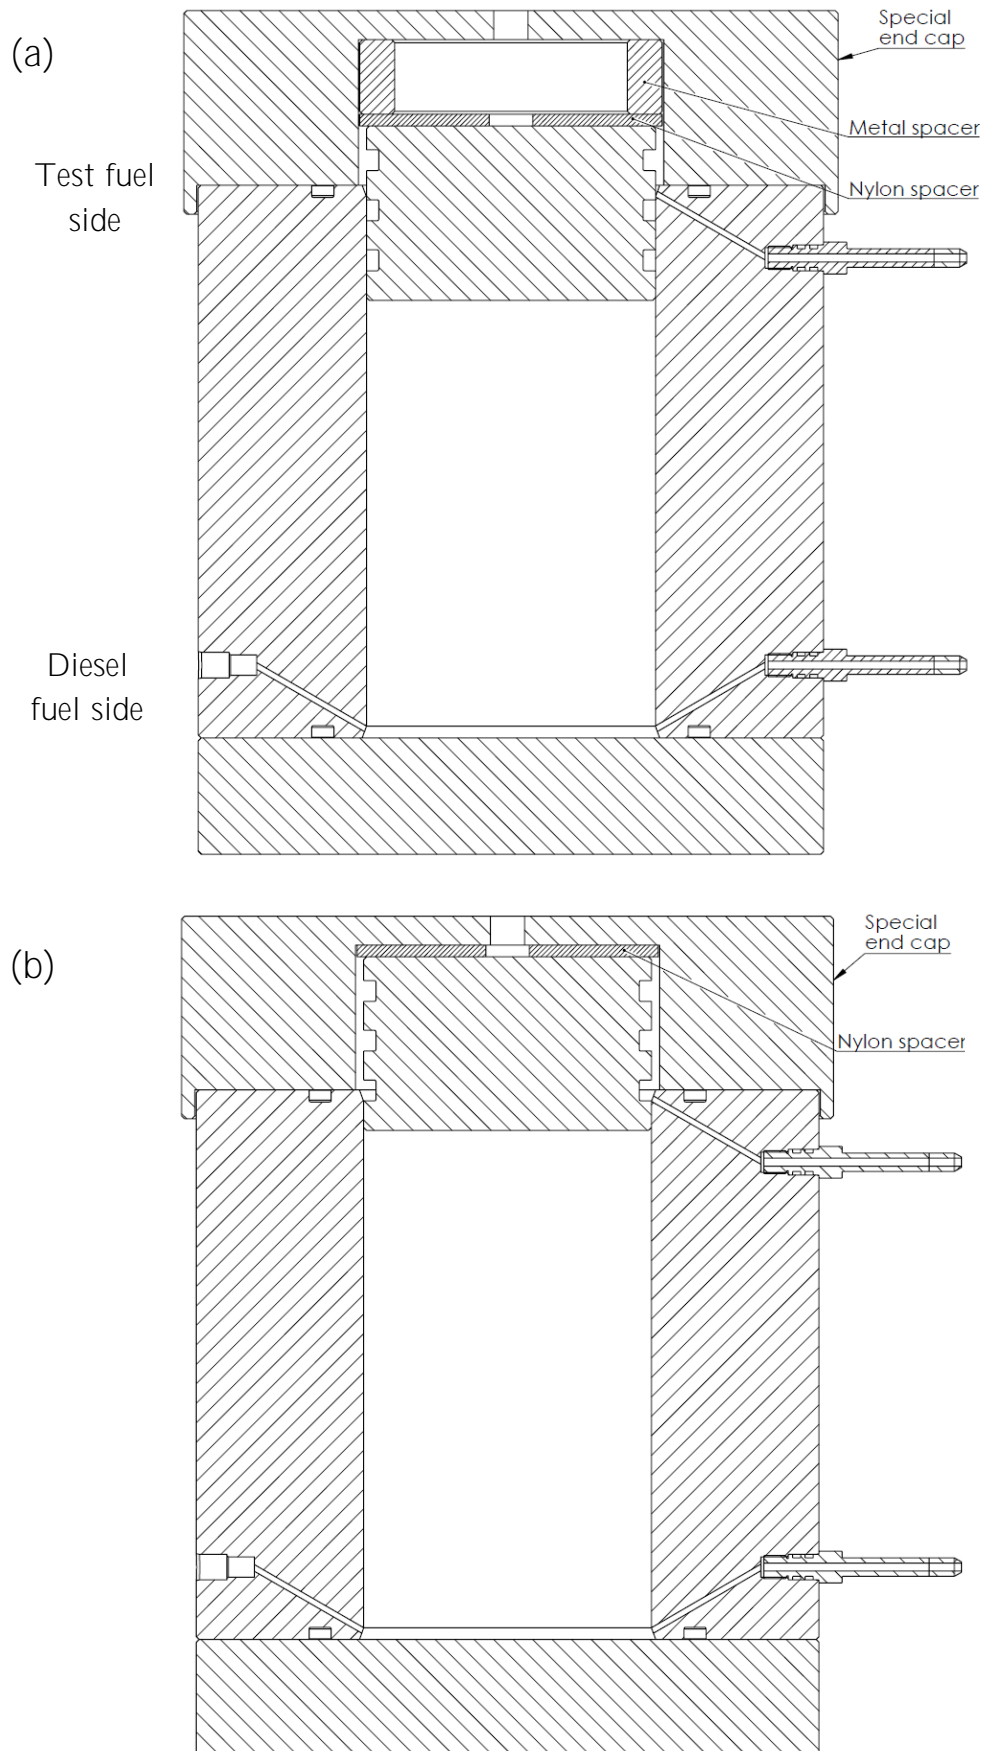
Cross-sectional view of the fuel system with the special cap showing (a) piston position with the top O-ring exposed and (b) piston completely removed from the main cylinder
